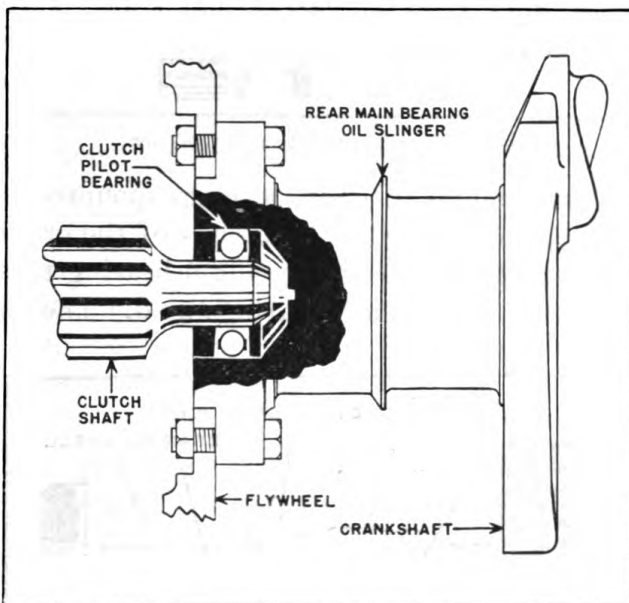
Rear end of crankshaft, showing flywheel mounting and recess for clutch shaft pilot bearing.
